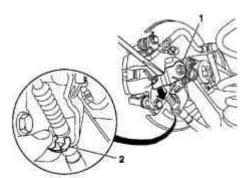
Joining the parking brake cable system: 1, 2 - wire ropes of the parking brake system
